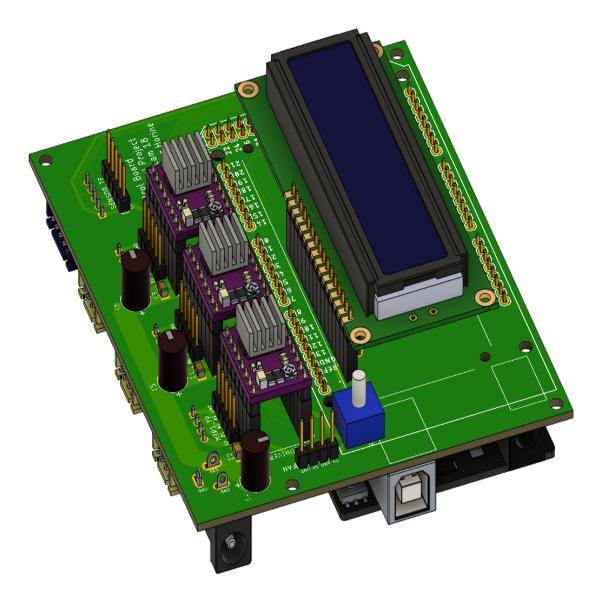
This is a rendering of the 3D model produced form the board designed with components added to give an idea of what the board will look like assembled. It will also be used to design the enclosure.
